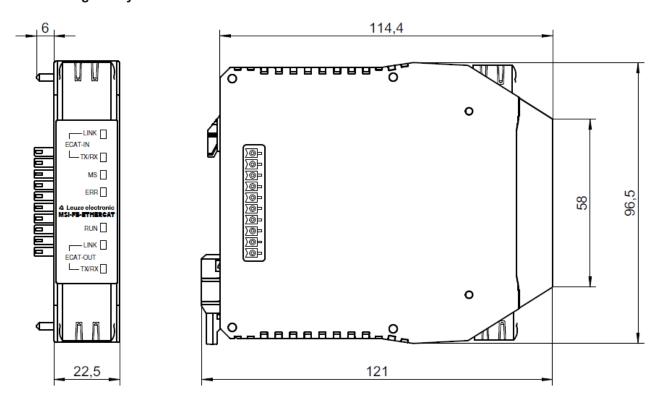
Dimensional drawing EtherCAT gateway (mm)
